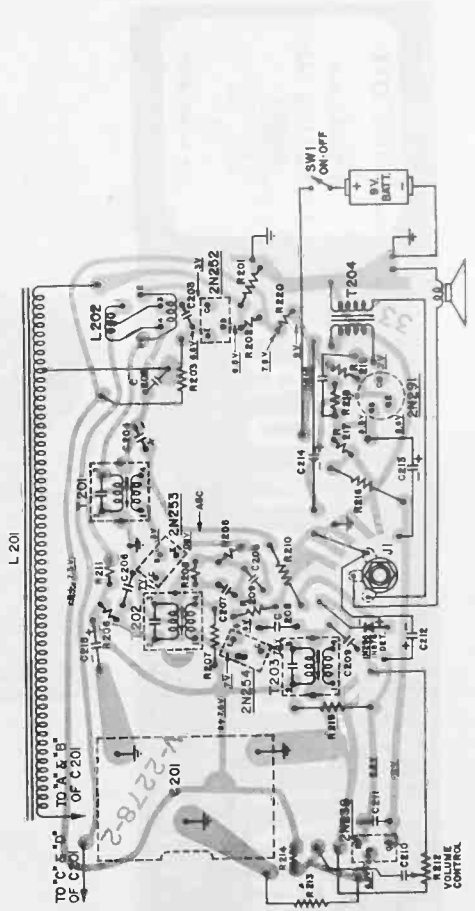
Bottom View of Printed Board Showing Top Components Symbolically
